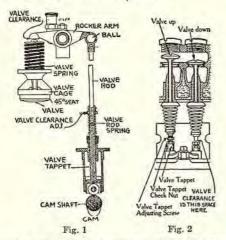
Valve clearance on valves-in-the-head is measured between the end of the rocker-arm and the top end of valve, as above.
